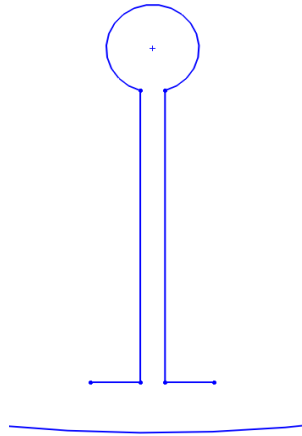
Keyhole Stiffener Next to Outer Wall
